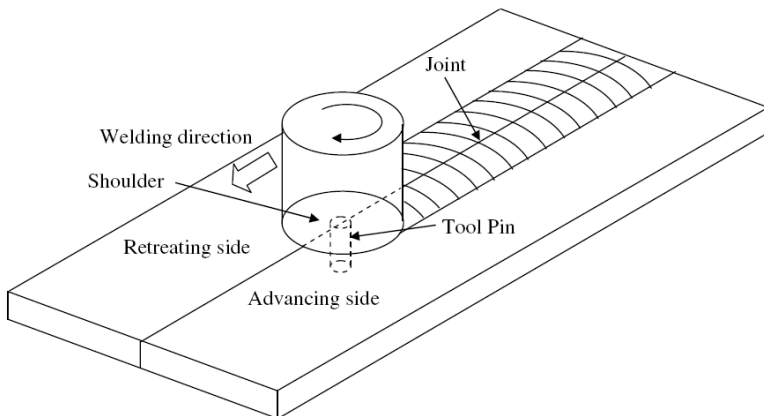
The basic principles of friction stir welding of a butt joint [6].
